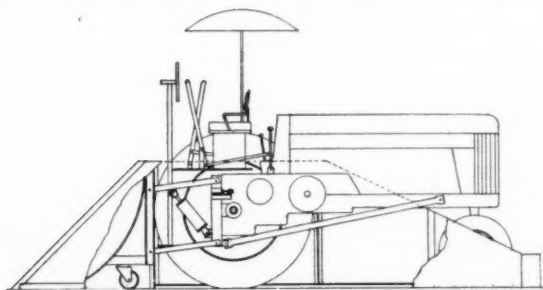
Schematic drawing of corn dozer mounted on tractor
